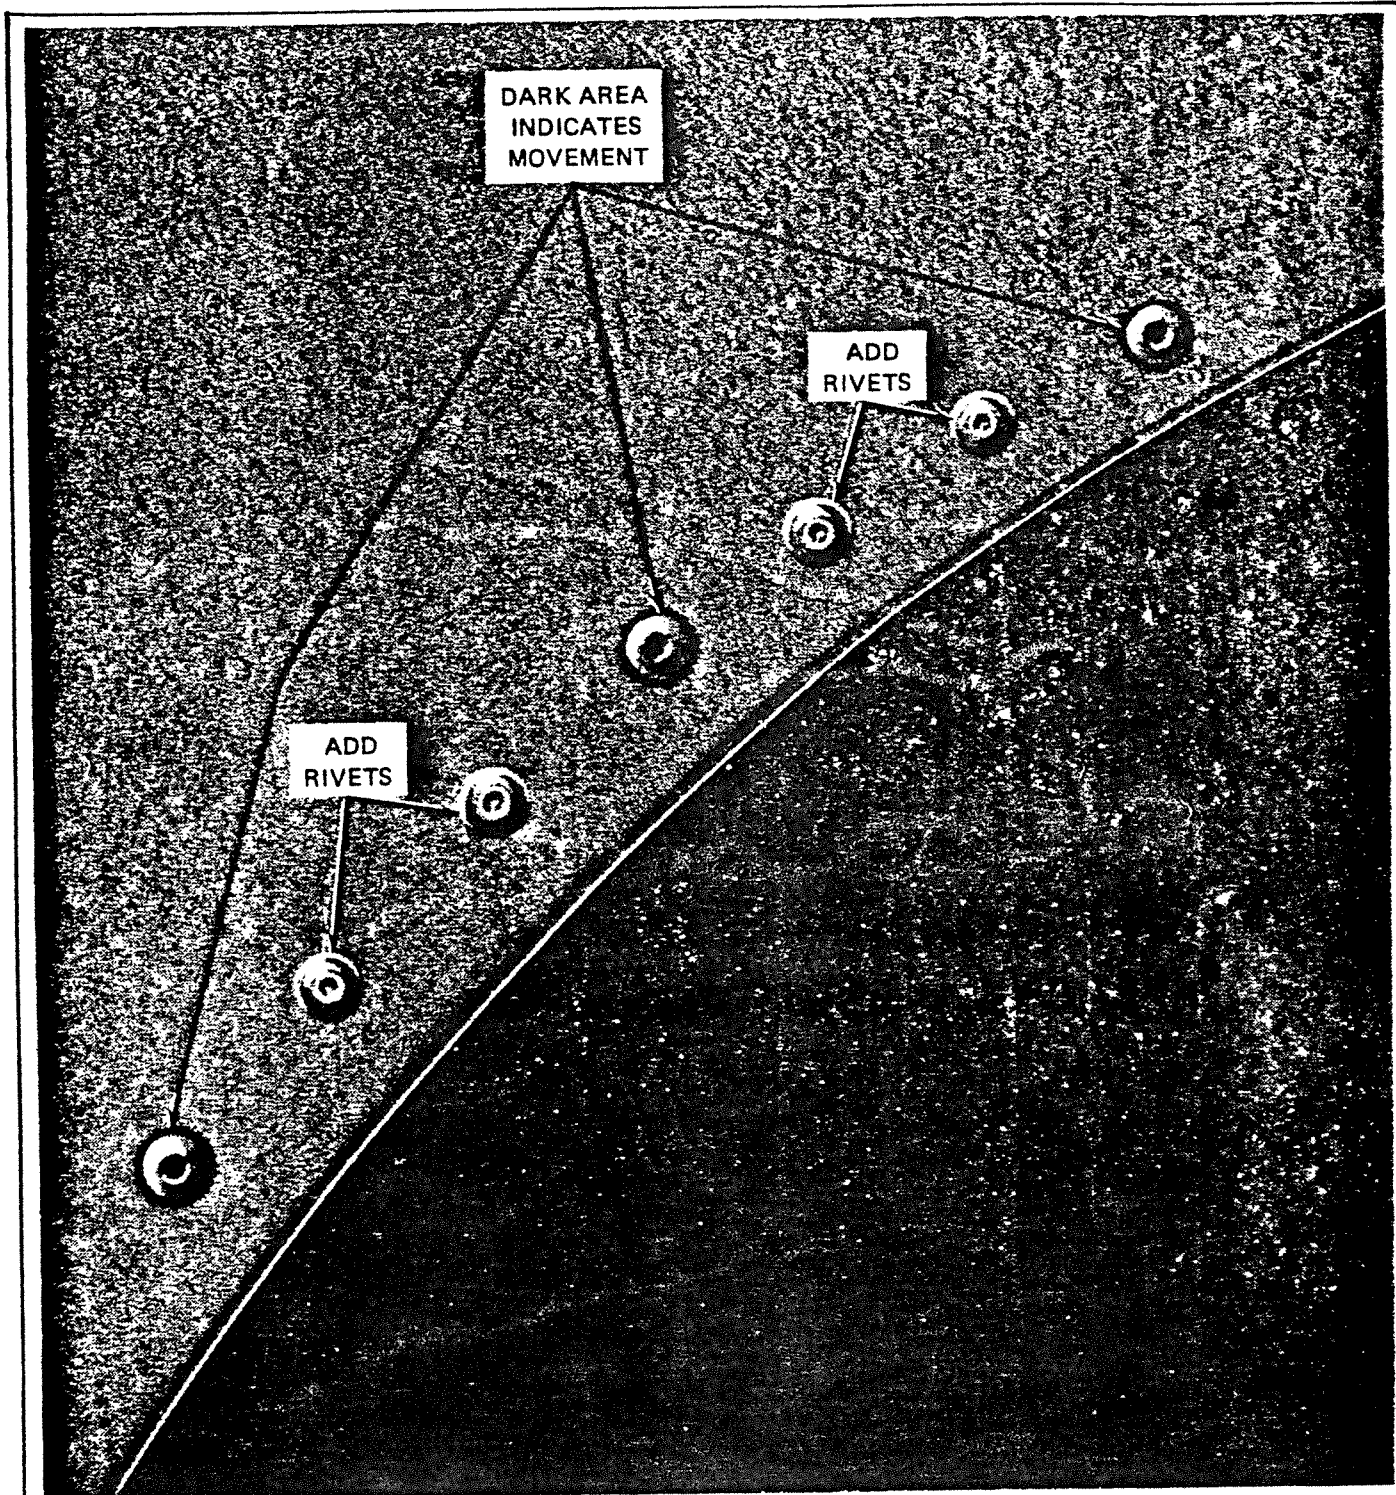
SHEAR PANEL TO WHEEL WELL CONNECTION.
